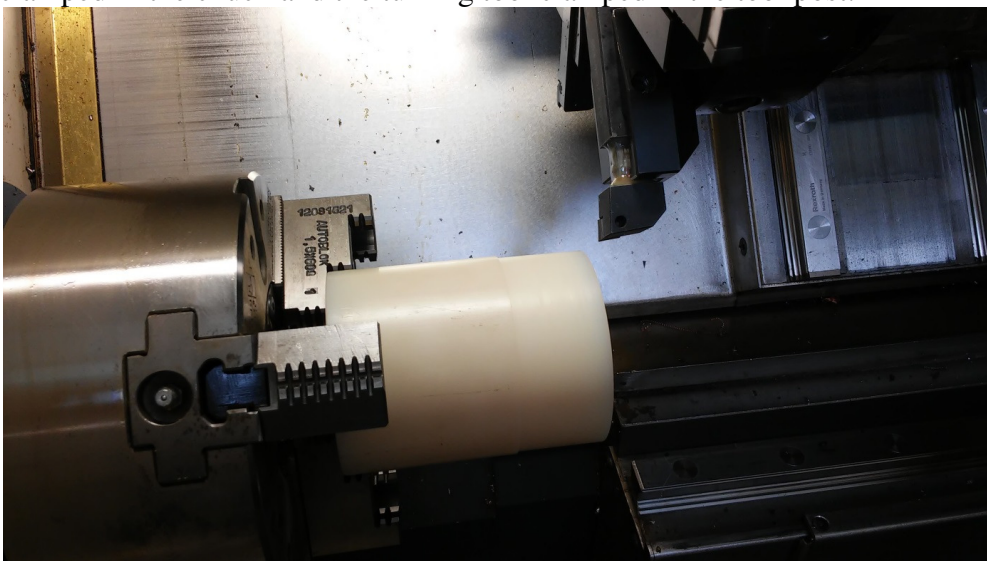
The workpiece clamped in the chuck and turning tool clamped in the tool post
